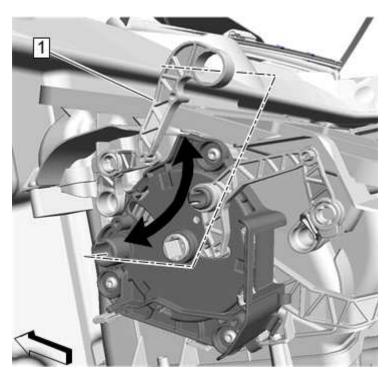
Defroster Control Lever Courtesy of GENERAL MOTORS COMPANY
